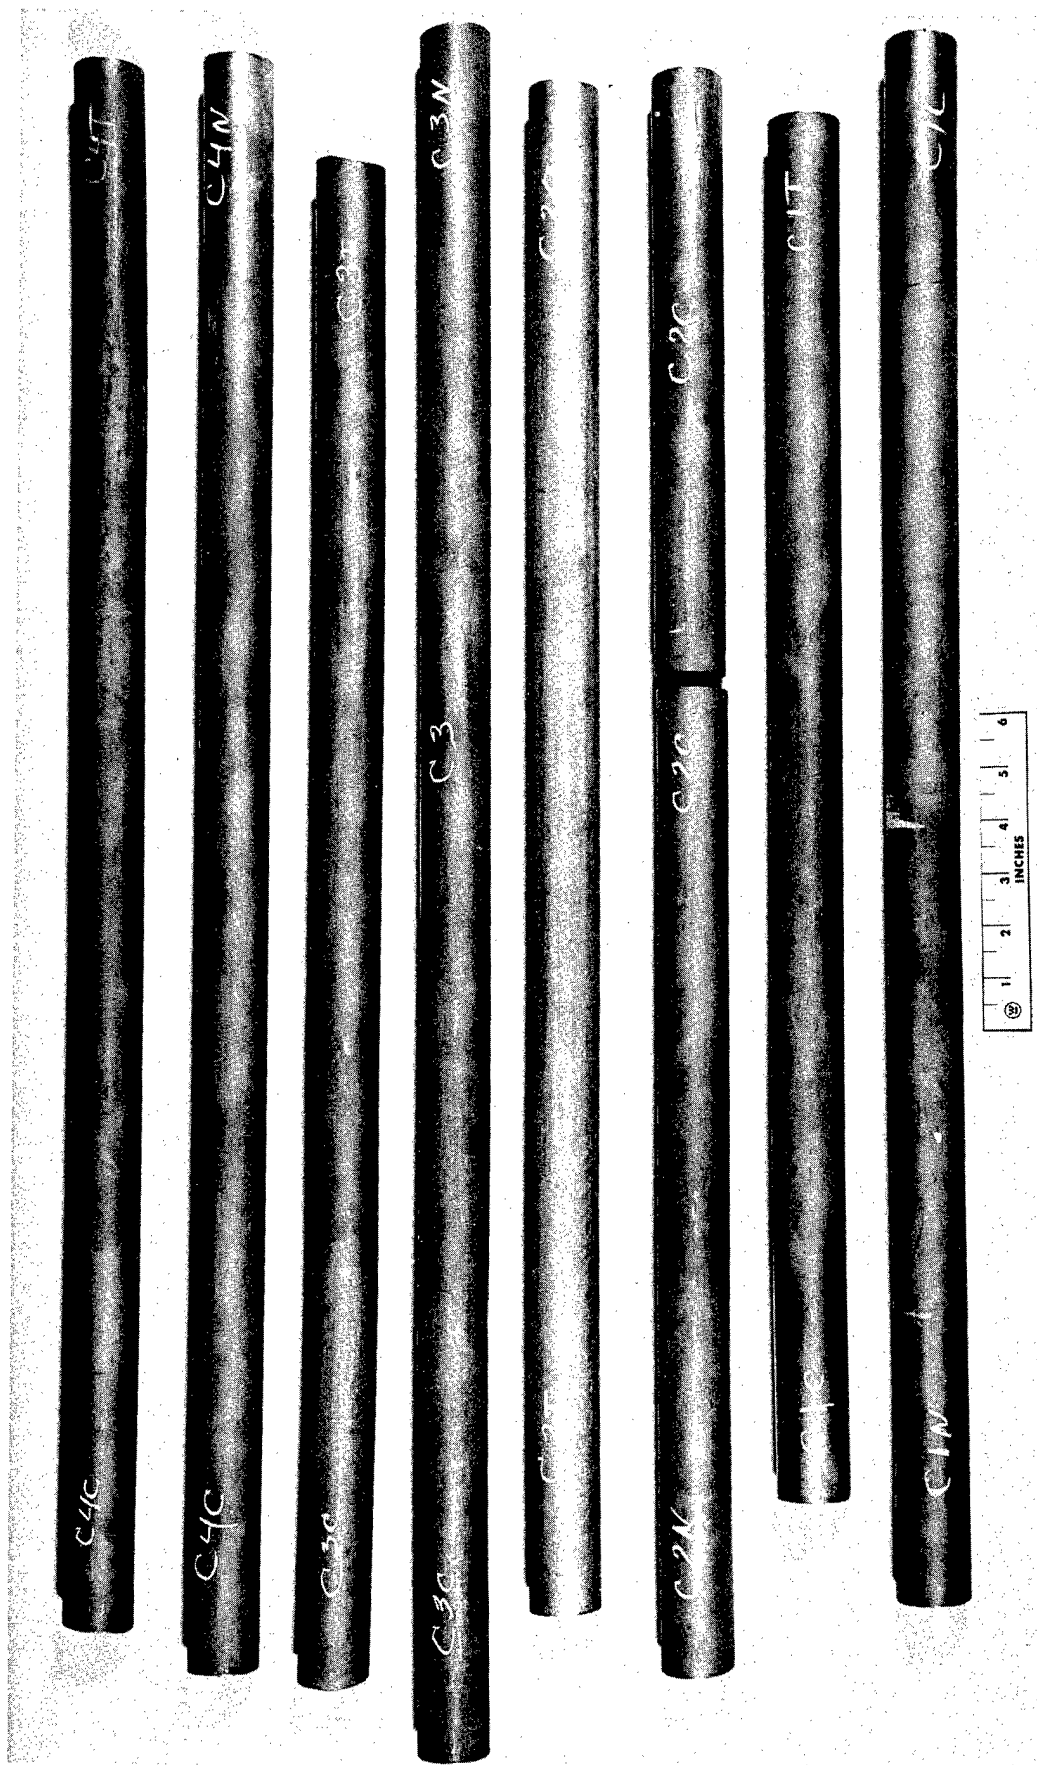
B-66 Tube Blanks After First Tube Reducing Pass
